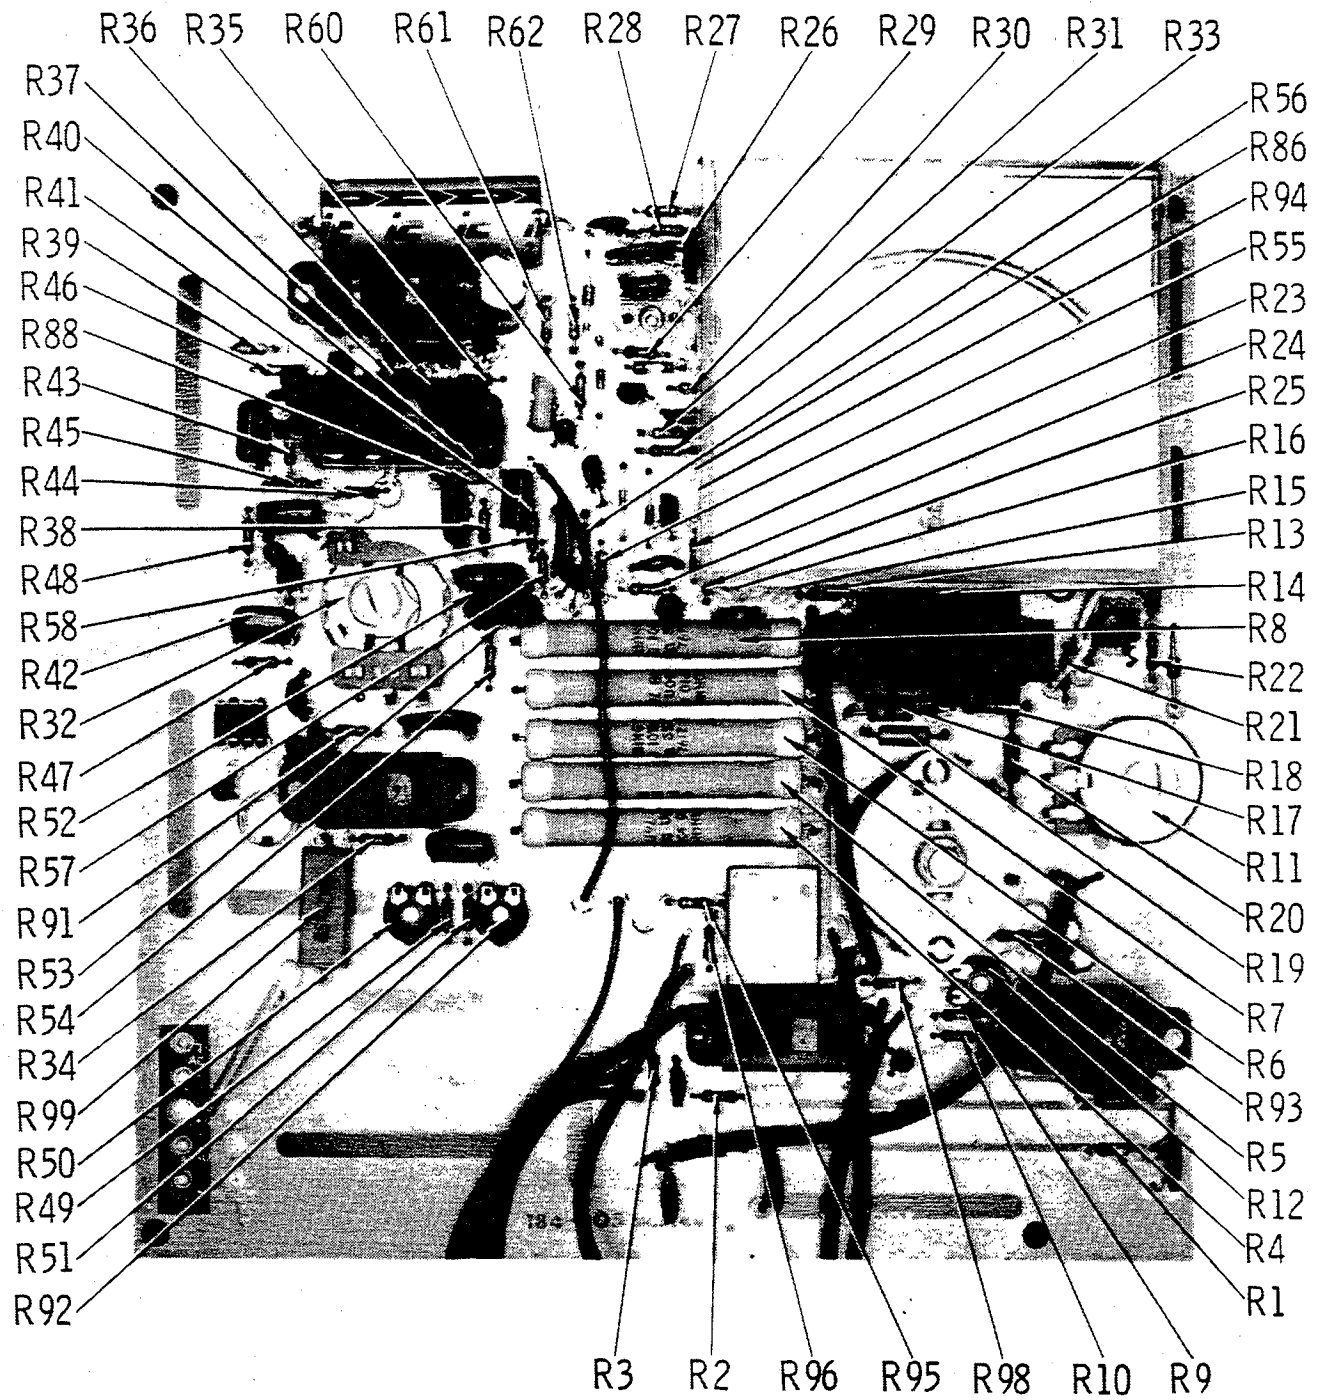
RF Printed Circuit Board, Top View, Parts Location.
